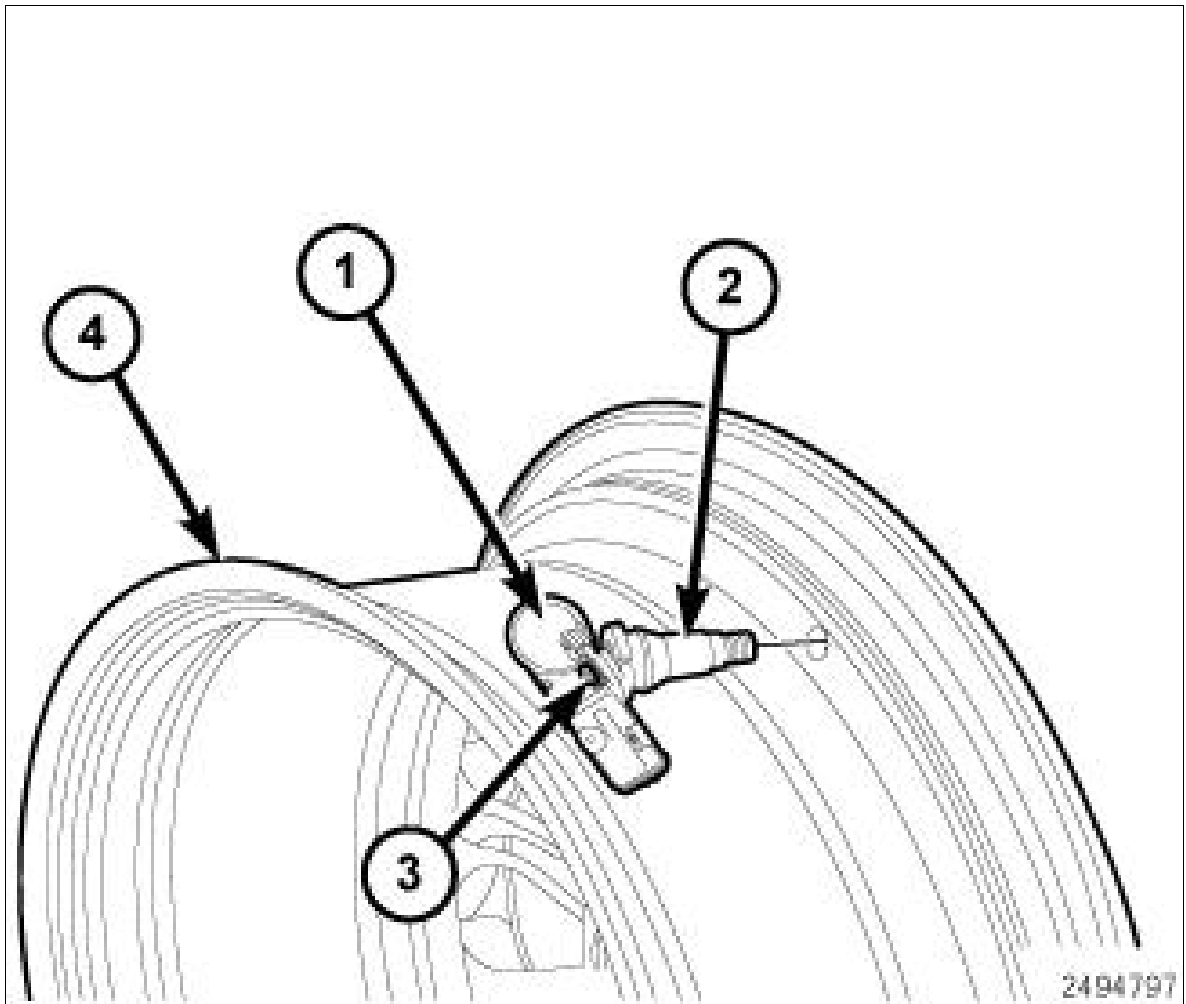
Start Mount/Dismount Tool Within 10 Degrees Of Valve Stem
